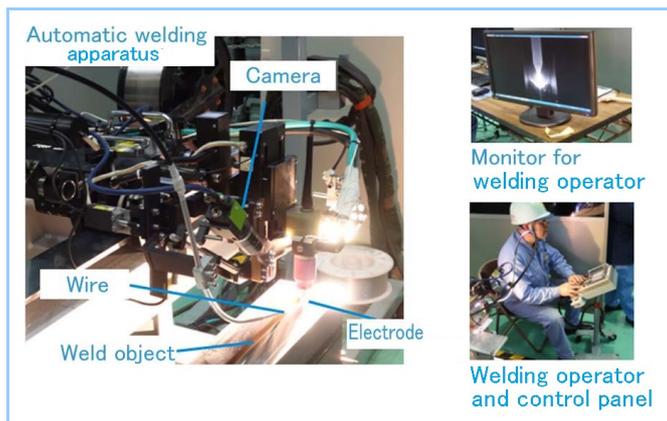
Situational diagram of conventional automatic TIG welding
